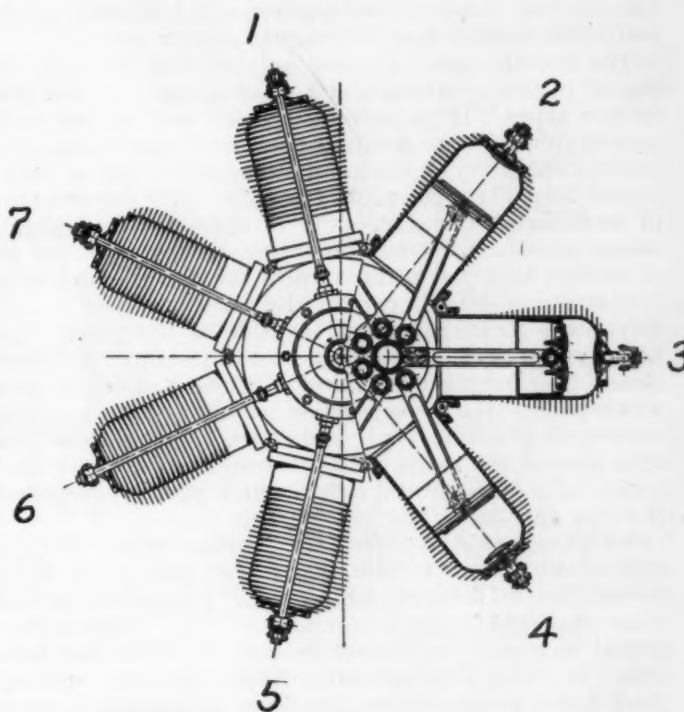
ARRANGEMENT AND ORDER OF FIRING OF CYLINDERS IN A ROTARY ENGINE
